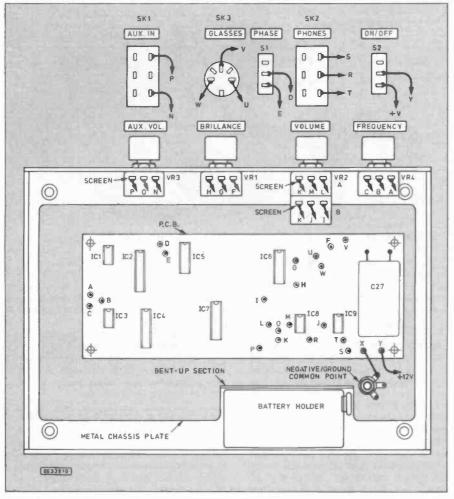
Interwiring of the front panel mounted components and the p.c.b. Only those sockets and controls that relate to this part are shown.
